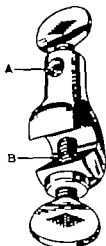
SHOWING DETAILS OF CLADWELL'S LUG.
